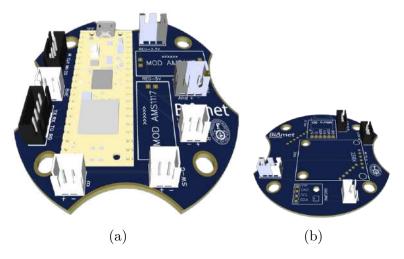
Lower part of the CanSat: a) PCB 1 and b) PCB 2.
